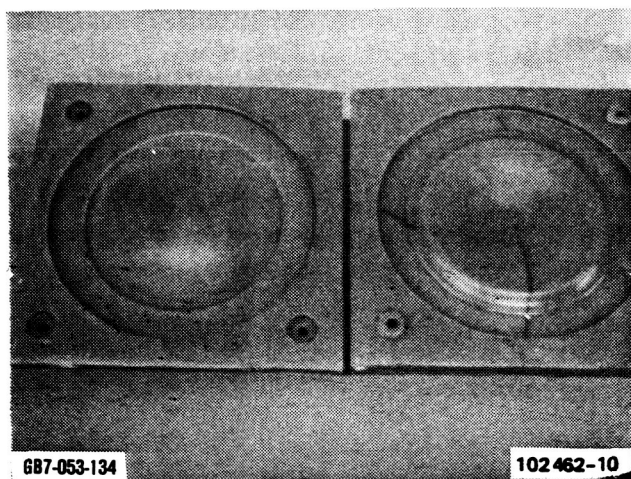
Drag Coated Mold Assembly Showing Metal Insert In Place.
